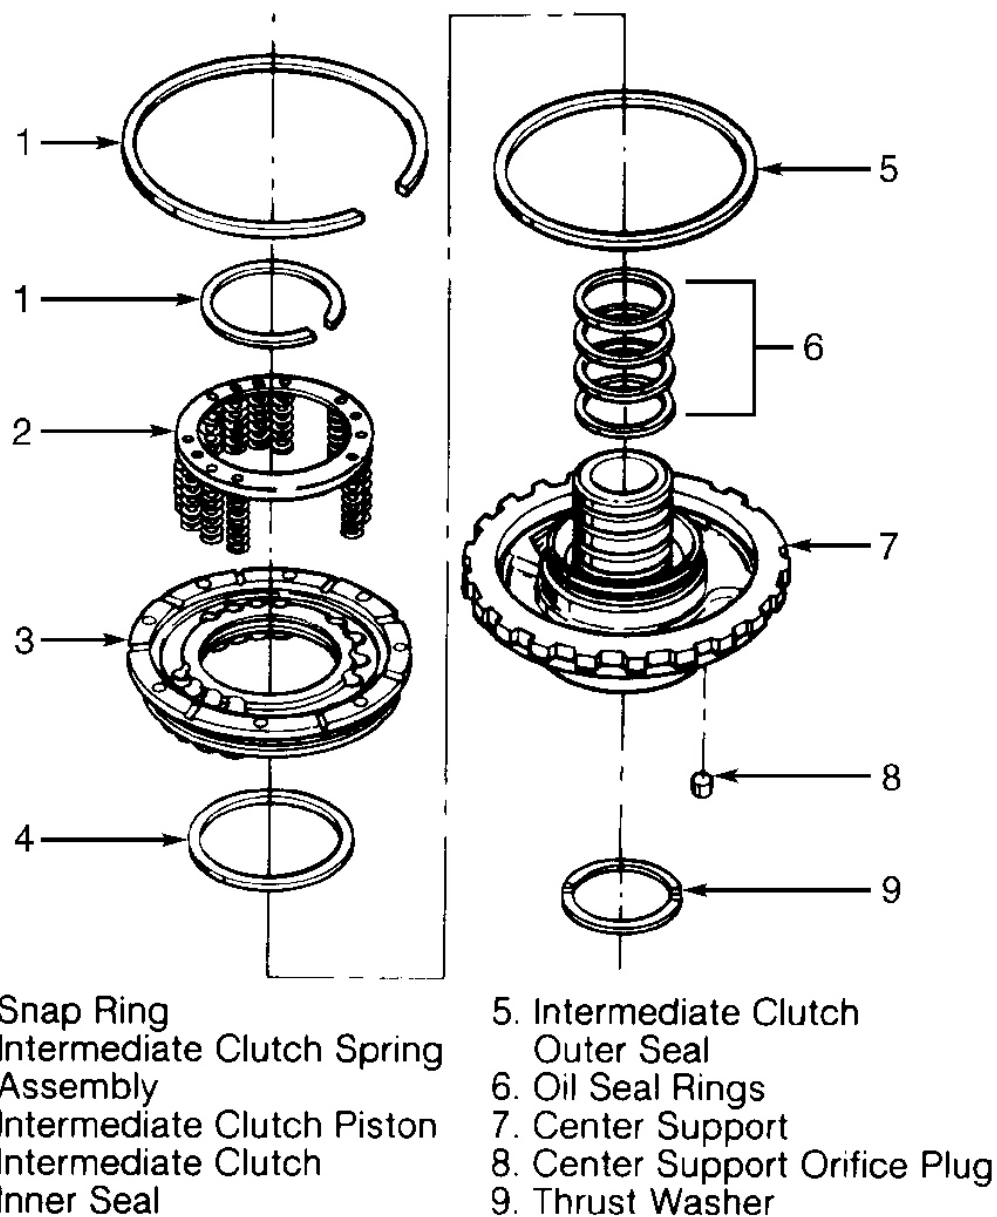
Exploded View of Center Support & Rear Gear Unit
